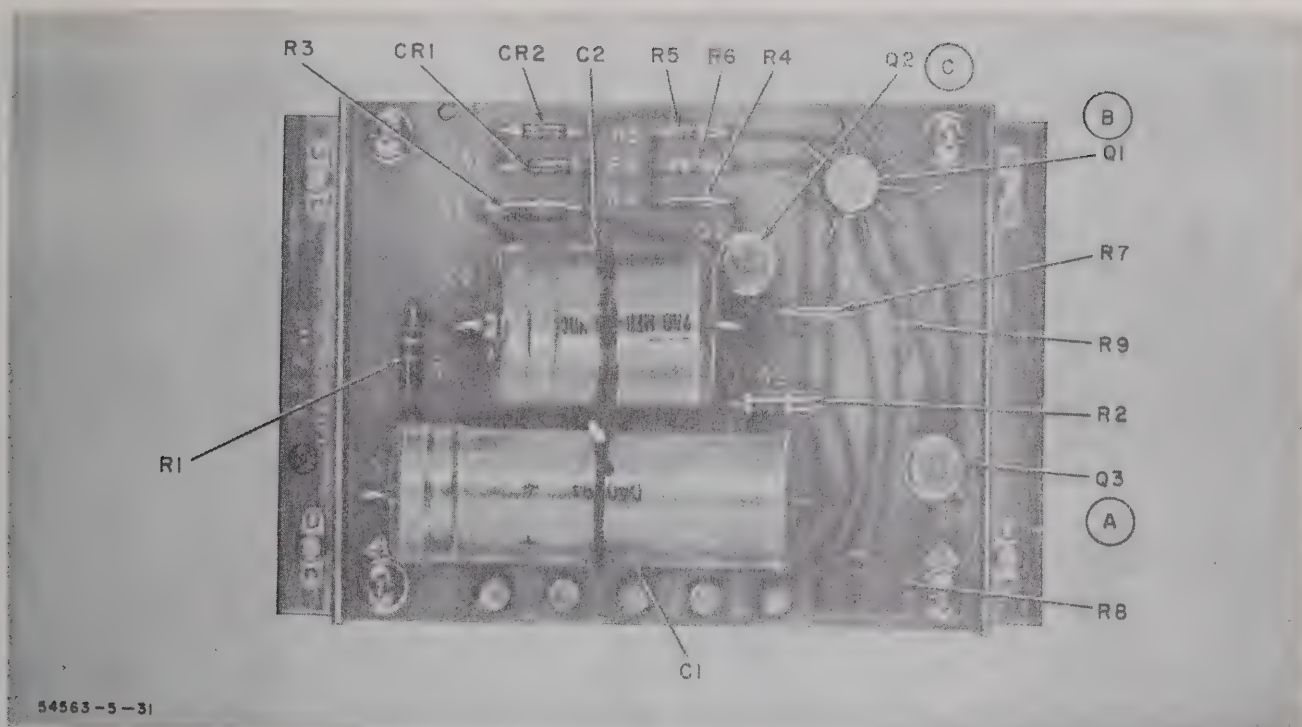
+28-Volt Regulator,Printed Wiring Board A1, ECI 61-00929-001, Part Location
